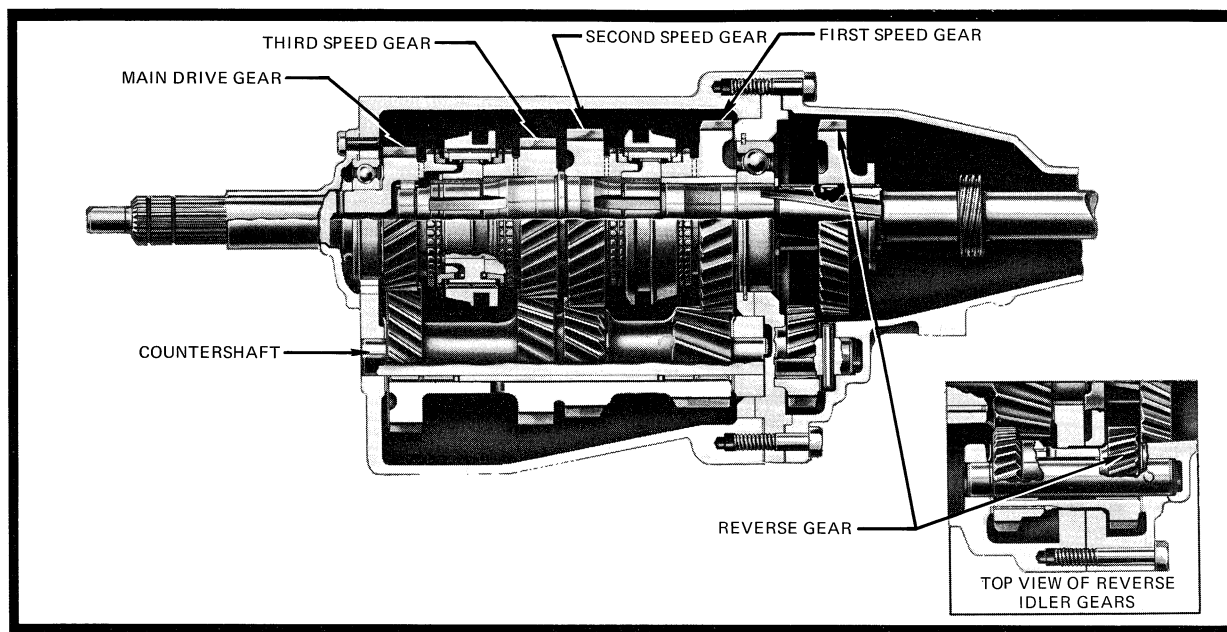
Courtesy Chevrolet Motor Div., GMC.
